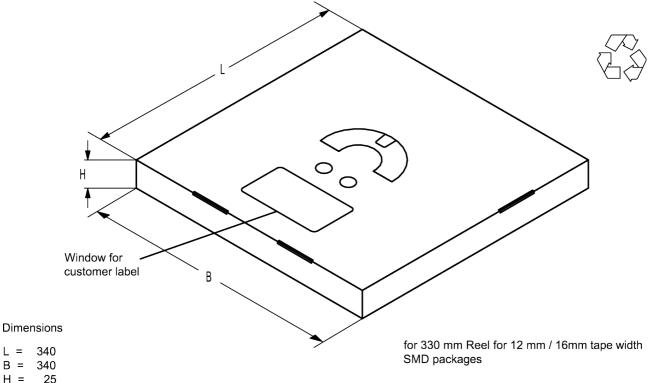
Drawing of folding box for reel with diameter of 330 mm.
